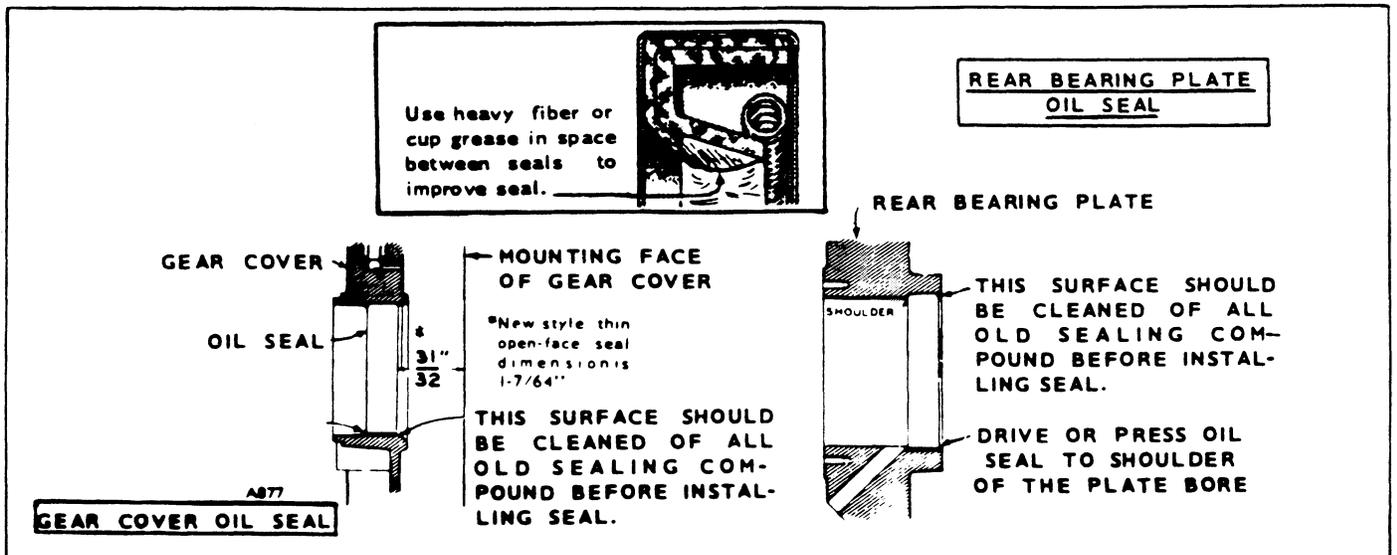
Gear Cover And Rear Bearing Plate Oil Seals
